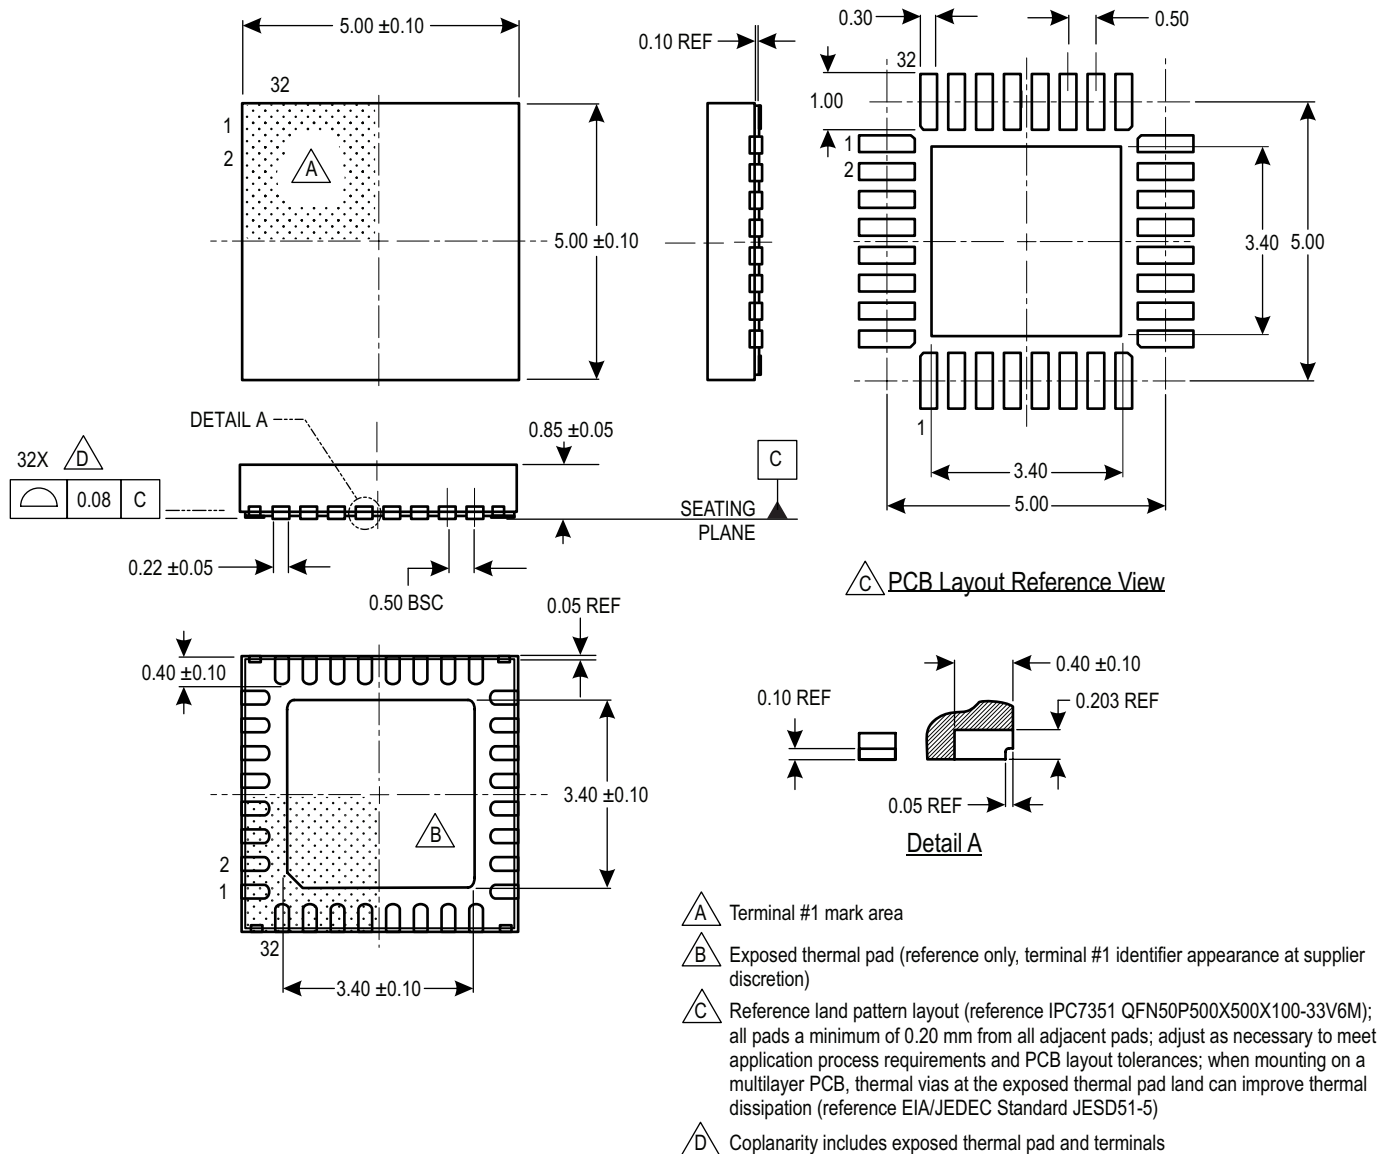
Package ET, 32-Pin QFN with Exposed Pad and Wettable Flank
